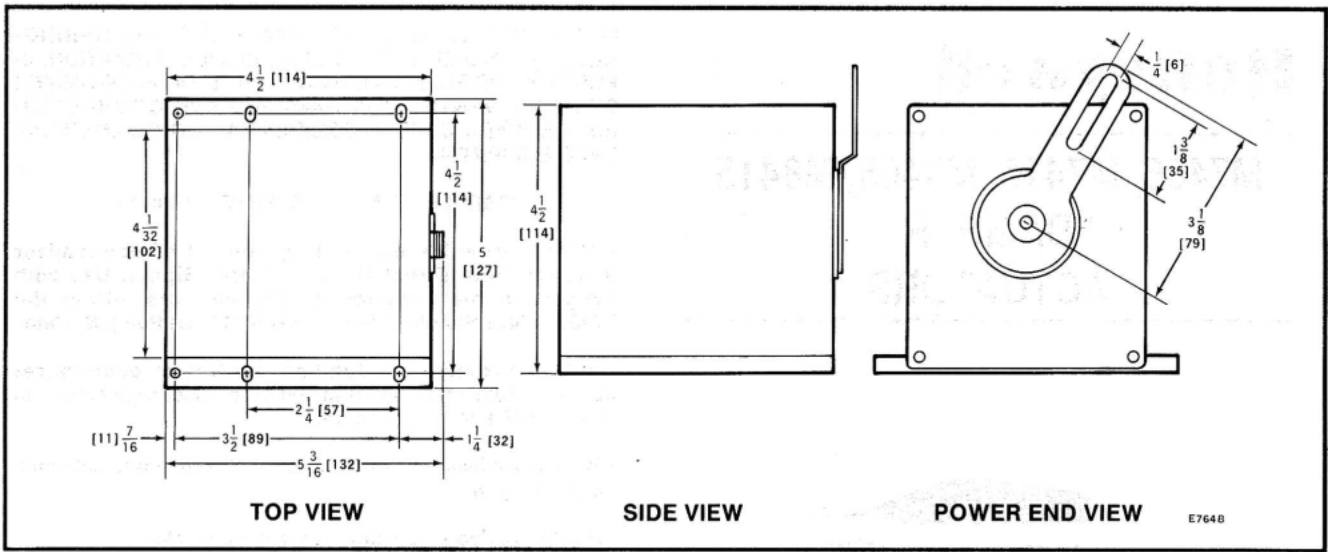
M7405, M7415, M8405, M8415 MOUNTING DIMENSIONS IN in. [mm IN BRACKETS].
